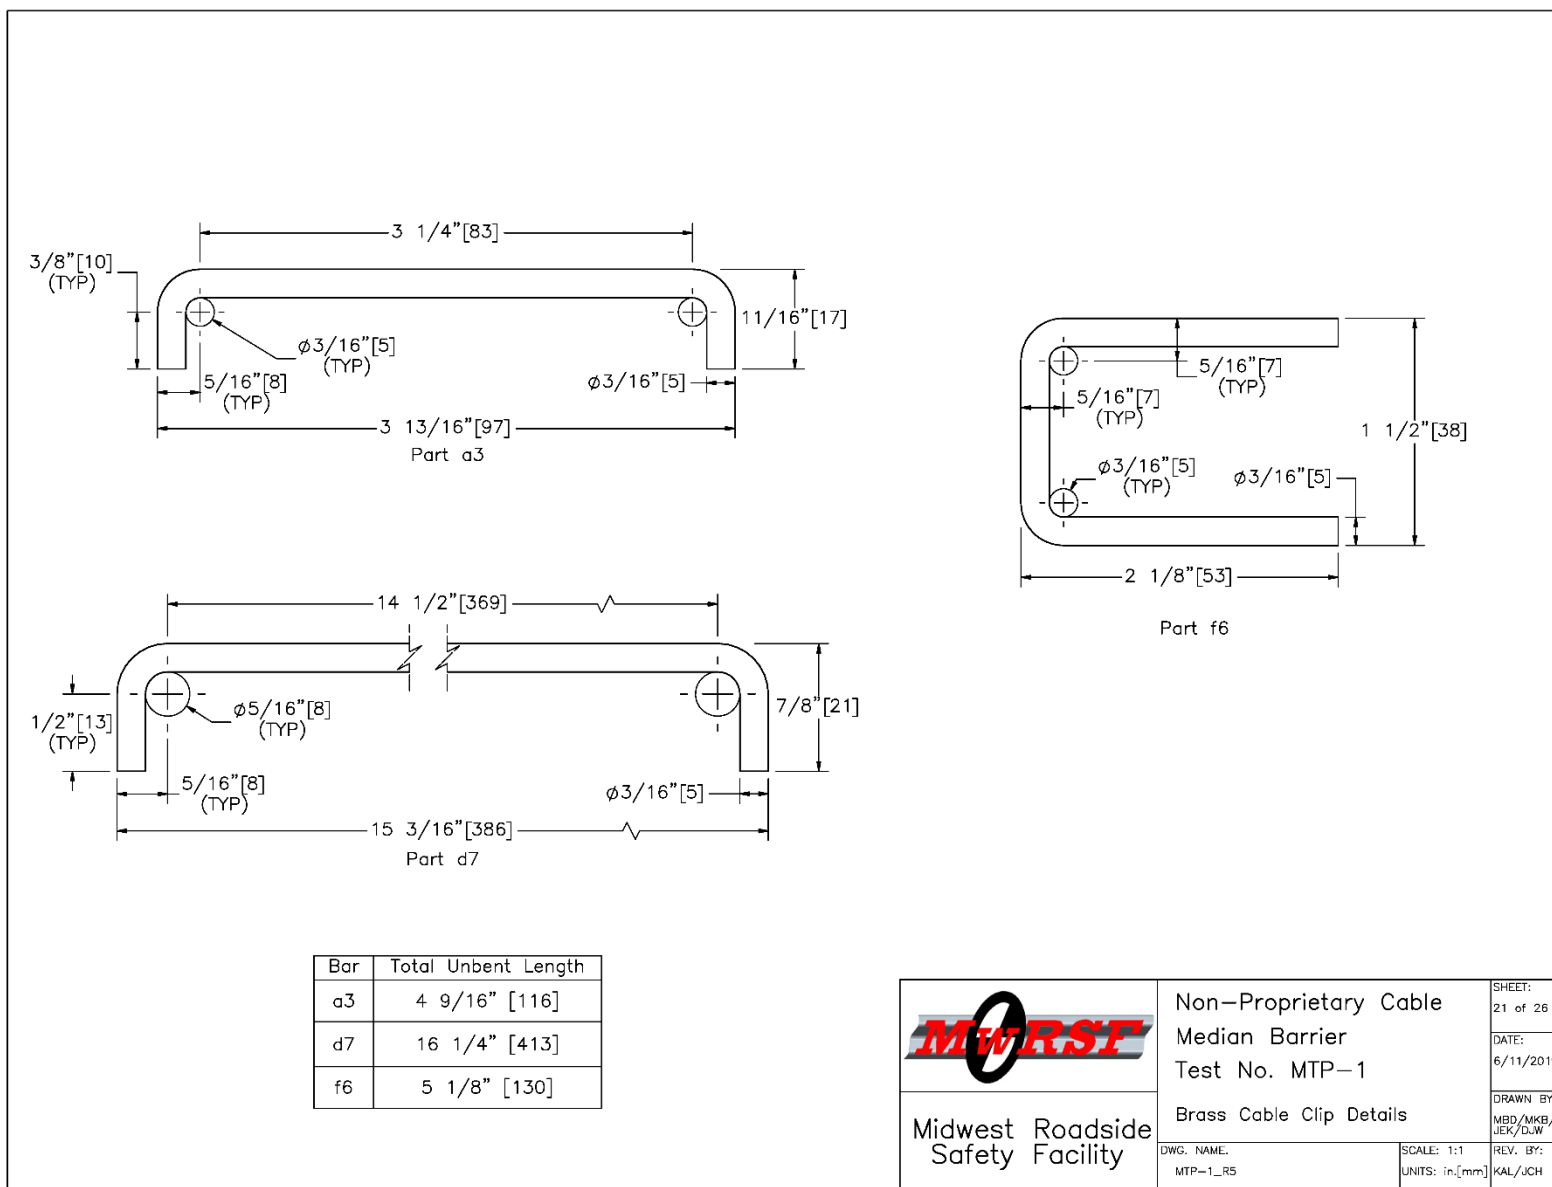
Brass Cable Clip Details, Test No. MTP-1
